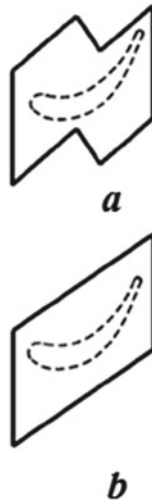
Z-shaped shrouding shelf (a) and shrouding shelf with straight contact surfaces (b)
